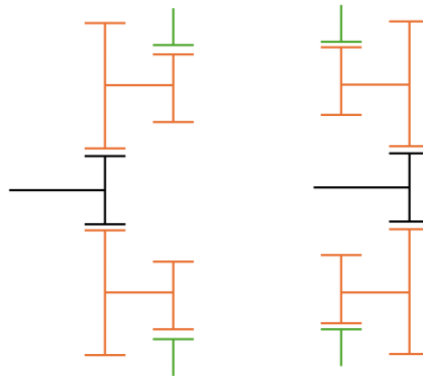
Stepped Planetary Detailed Configurations (Left) Ring Gear Wheel Side (Right) Right Gear Motor Side
